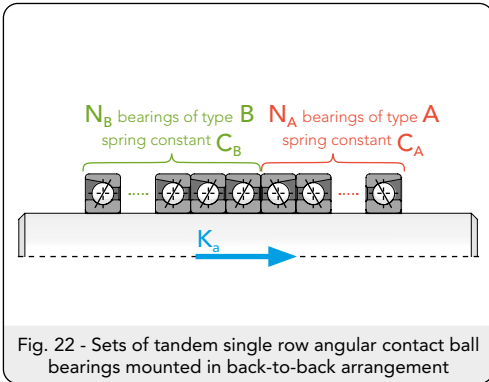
Sets of tandem single row angular contact ball bearings mounted in back-to-back arrangement
